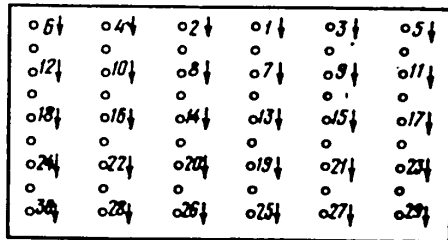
Outline of the Sequence of Drilling the Holes, Installation of Clamps, and Riveting by the Terminal Method
